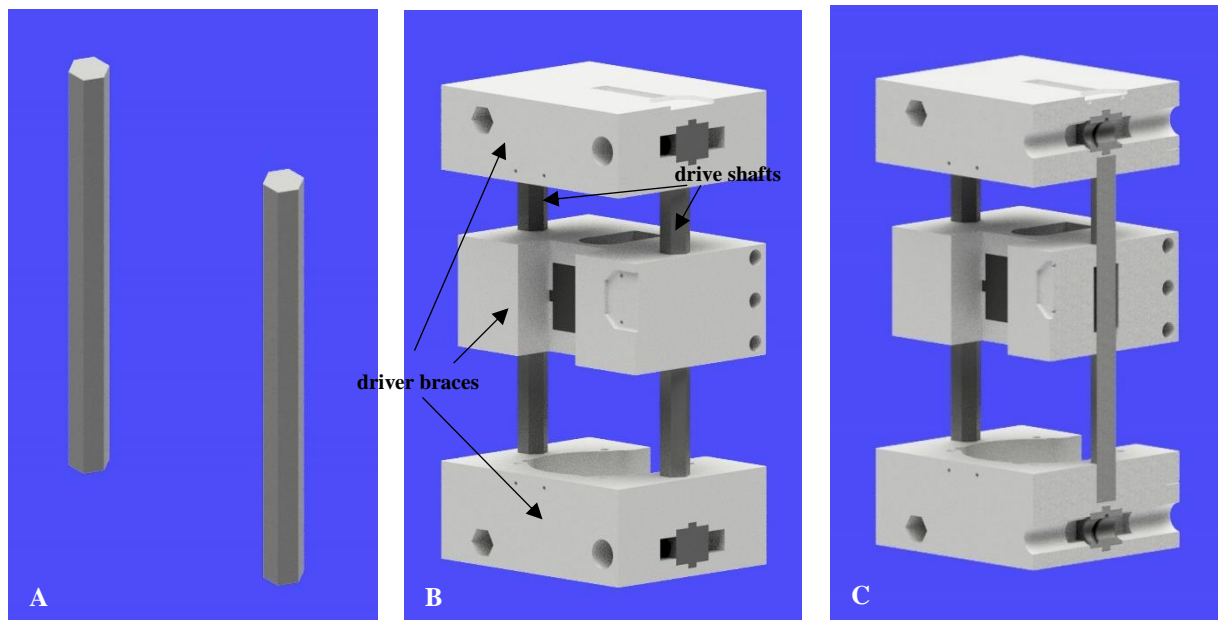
(A) Drive shafts (B) Interconnection of driver braces (C) Section View of B
